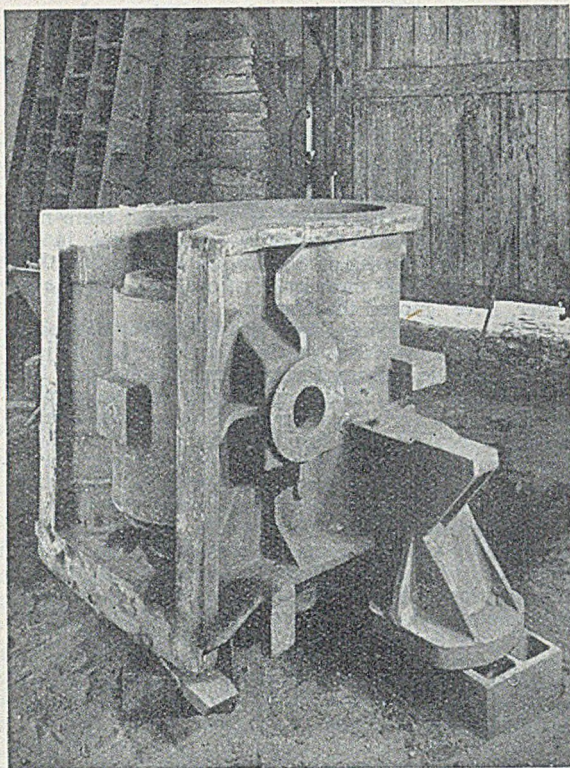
Small High-pressure Cylinder Casting for a 27-in. Stroke Reciprocating Engine, after Cleaning. This type of Job is given to the Younger Journeyman Moulder.
